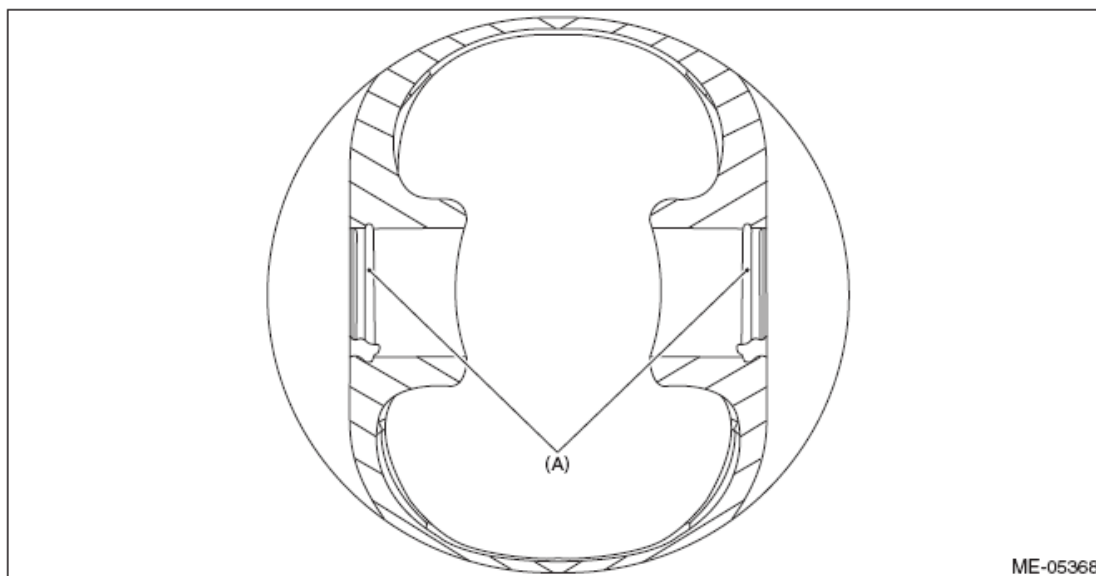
Identifying Piston And Piston Pin Circlip Groove
